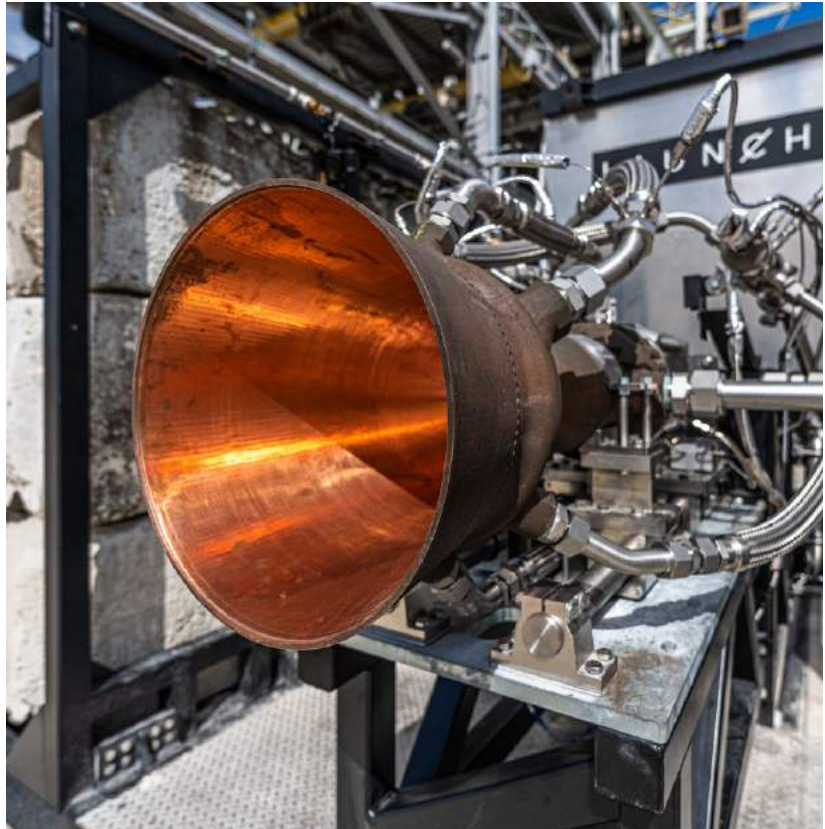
View showing the internal surface of the E-2 combustion chamber (Courtesy Launcher/John Kraus)
